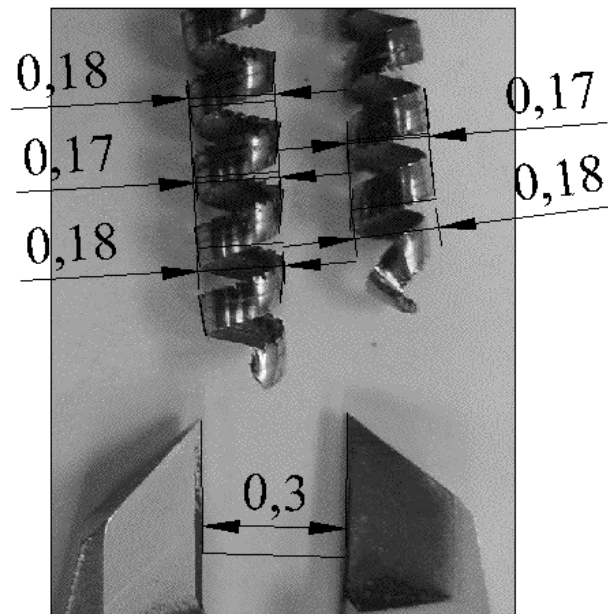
Chip Dimensions Produced by 0.06 in. Depth of Cut and 0.011 in/rev Feed Rate
